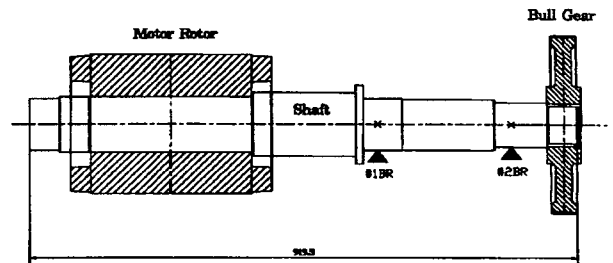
(a) The driving motor-bull gear rotor-bearing system
